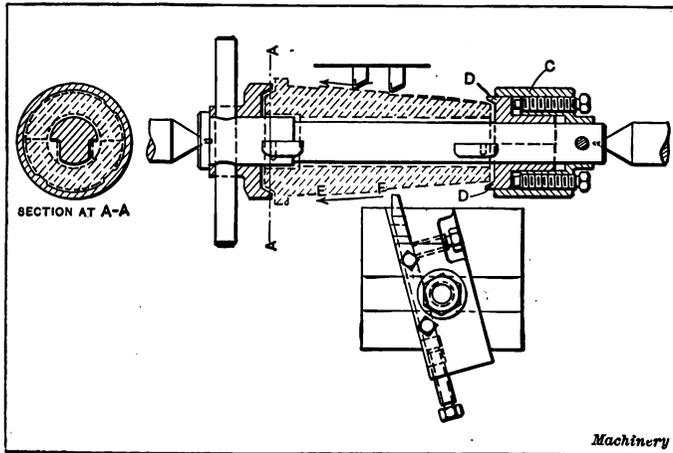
Arbor for holding Tapered Bushings with Rough Ends
